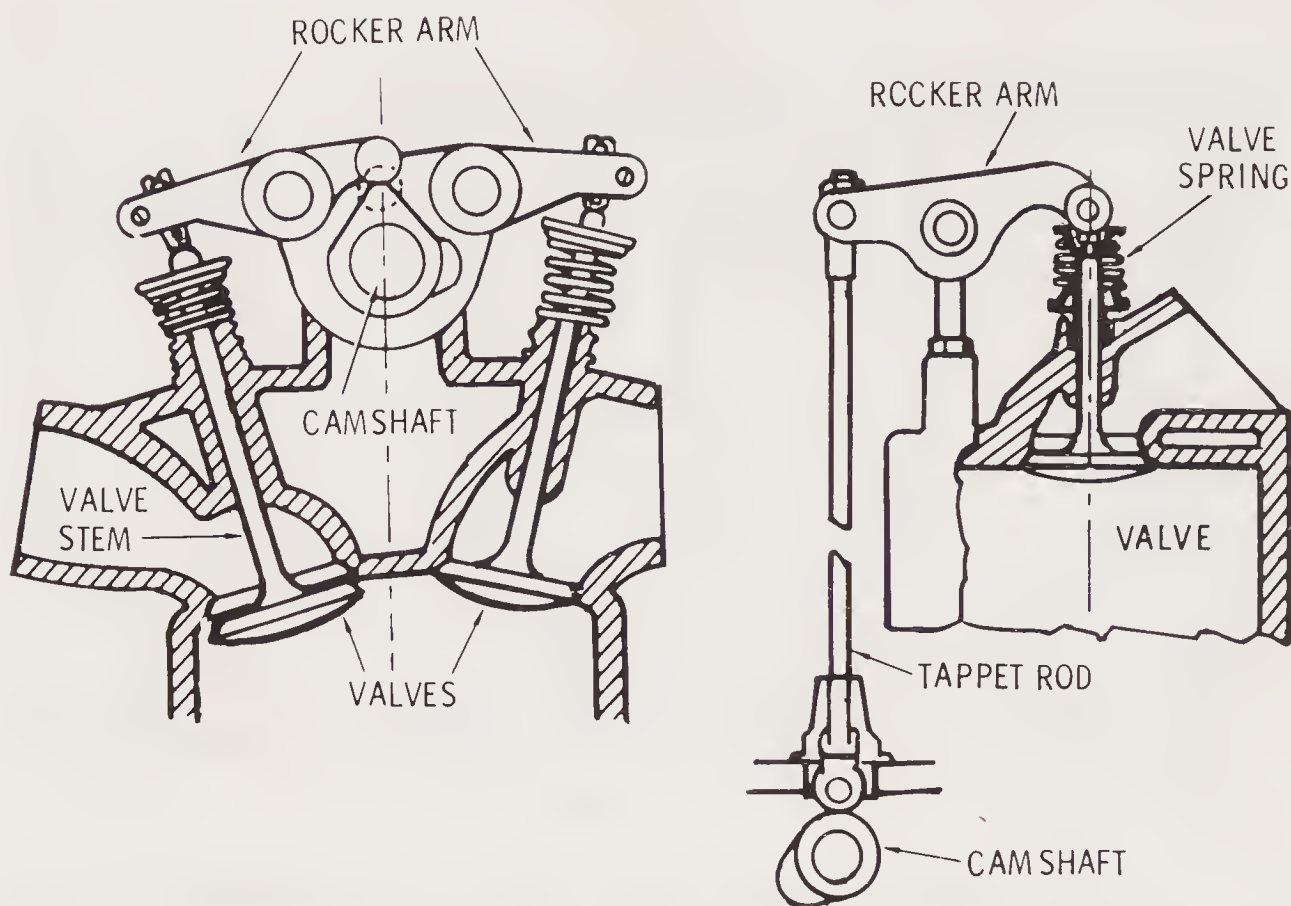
Overhead camshaft with rocker arms (left); and overhead valves operated by tappet and pushrods from camshaft (right).
